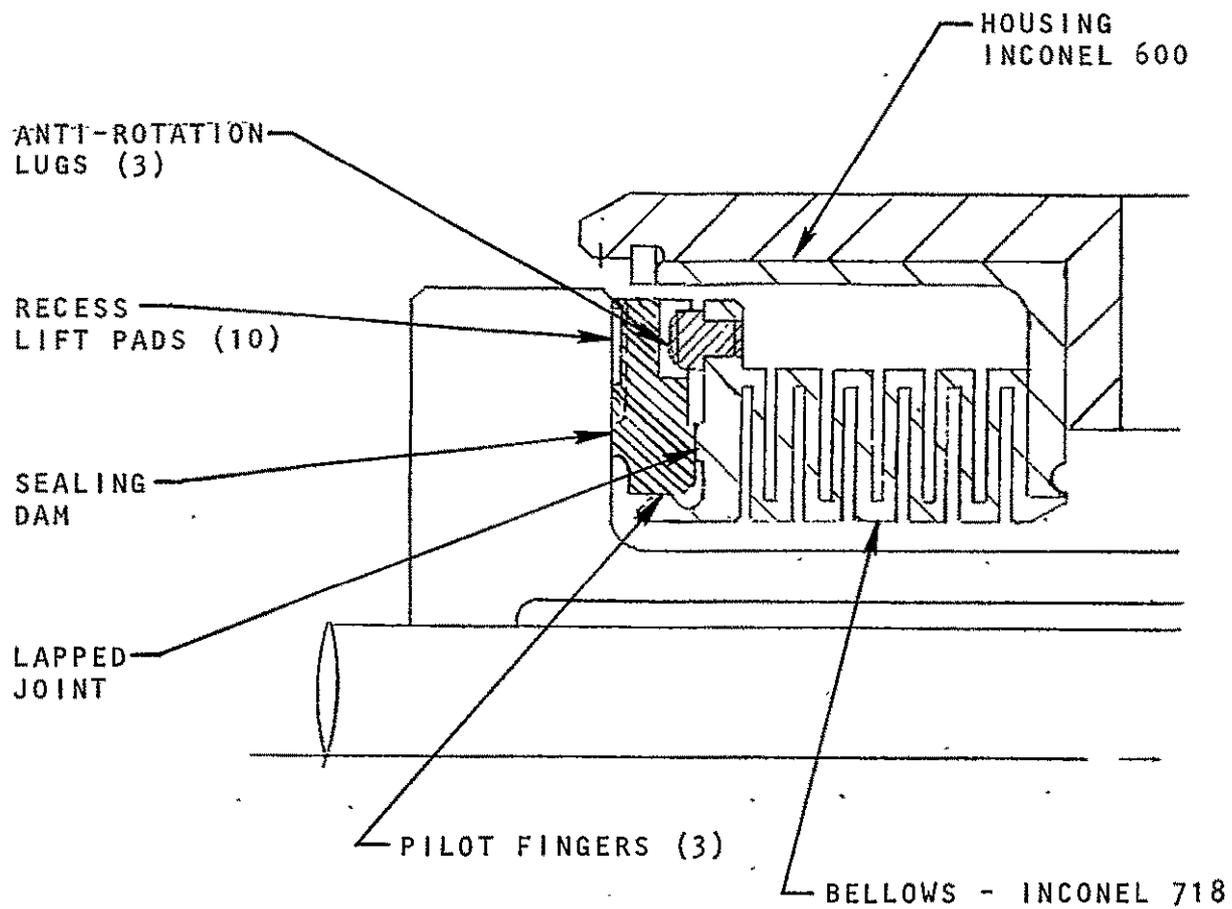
NASA-Provided Bellows LOX Seal Design Layout
